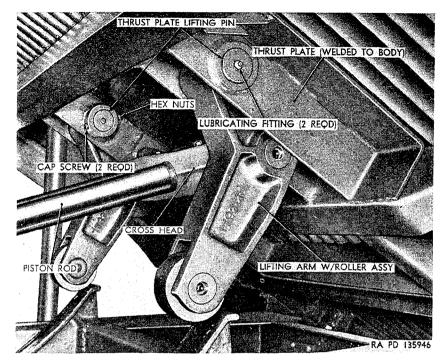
Left side of hoist assembly with dump body in raised position M51.
